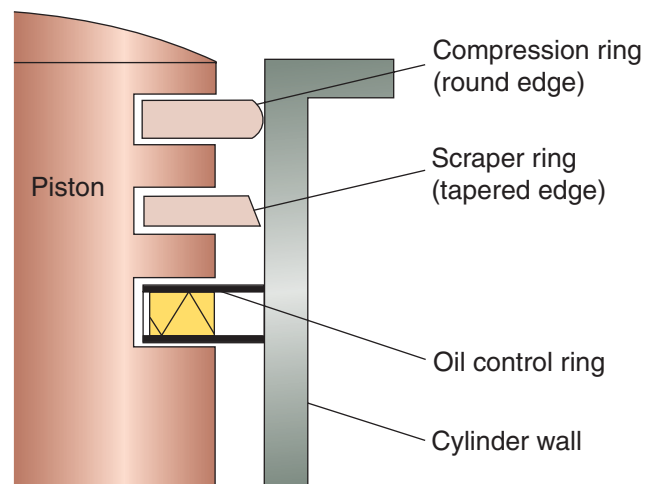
Three common types of piston rings found in four-stroke engine pistons.
